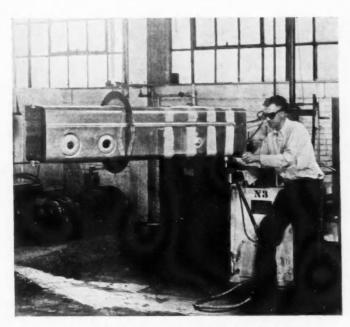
Shop Set-Up for Spotwelding Airplane Gasoline-Tank Design - Note Fixture for Holding Tank and Preparation of Surface Prior to Welding
